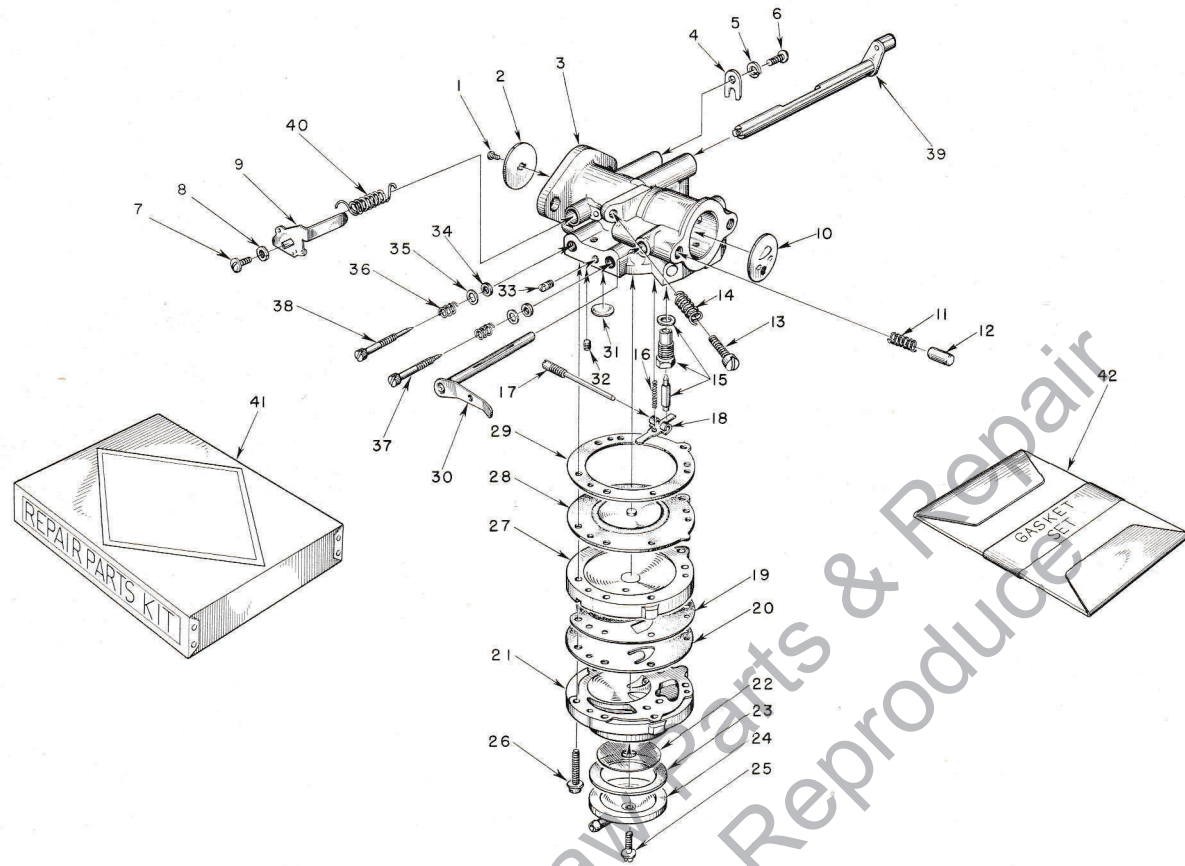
TILLOTSON HL-46B CARBURETOR PARTS
